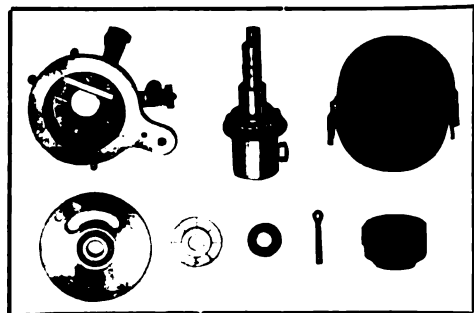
Showing Igniter Used with E and G Systems Completely Disassembled.
